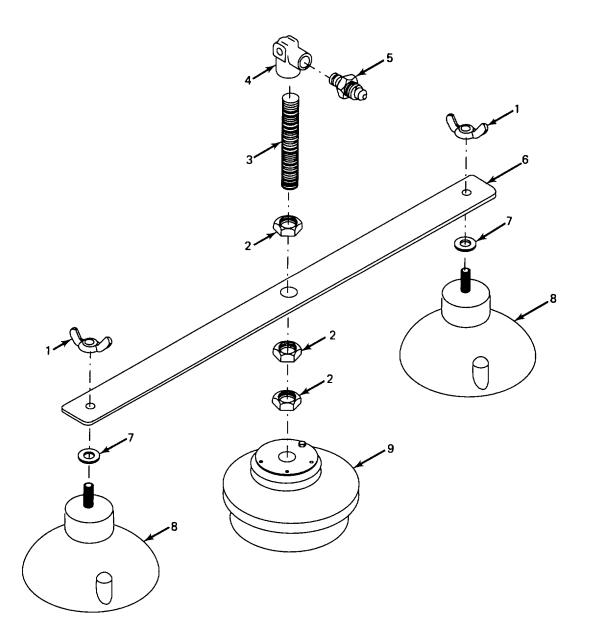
STATIC CLAMP ASSEMBLY (92-10113)
